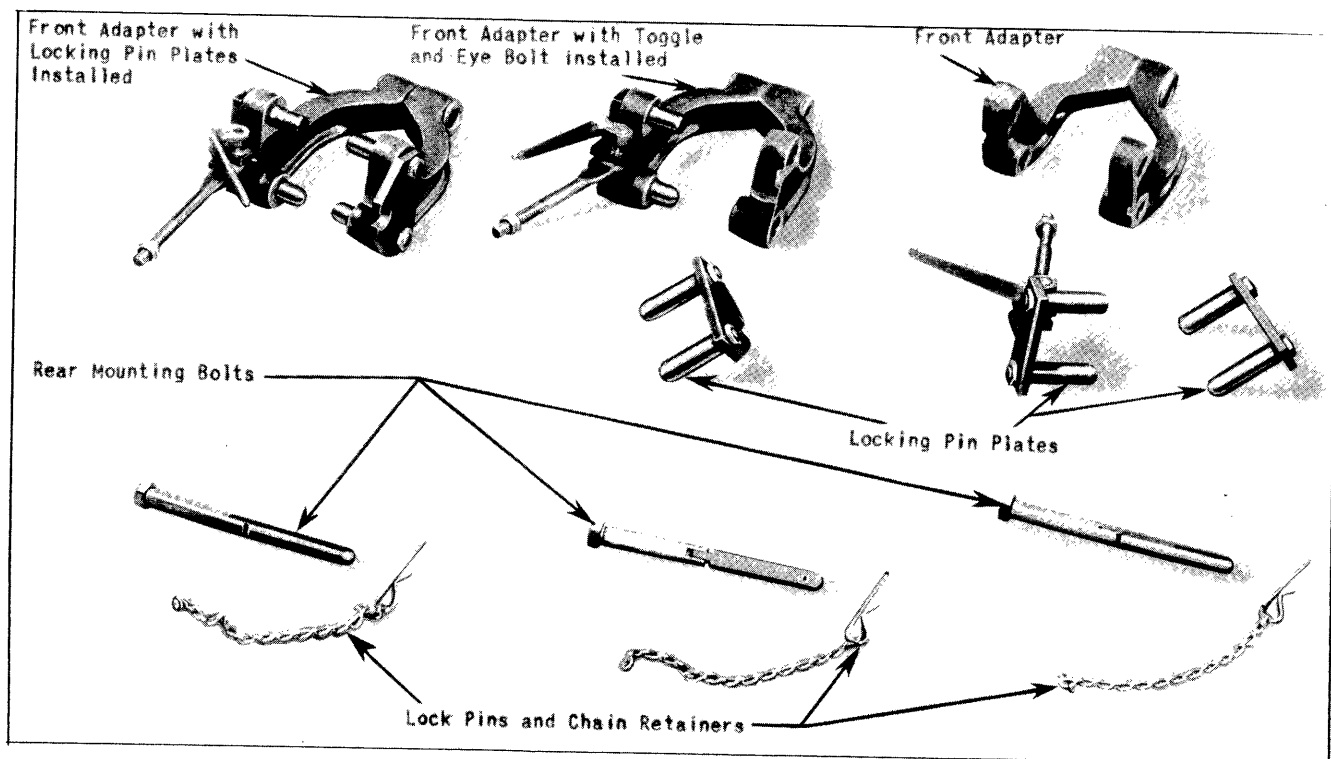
Front Adapter Assemblies and Rear Mounting Bolts
